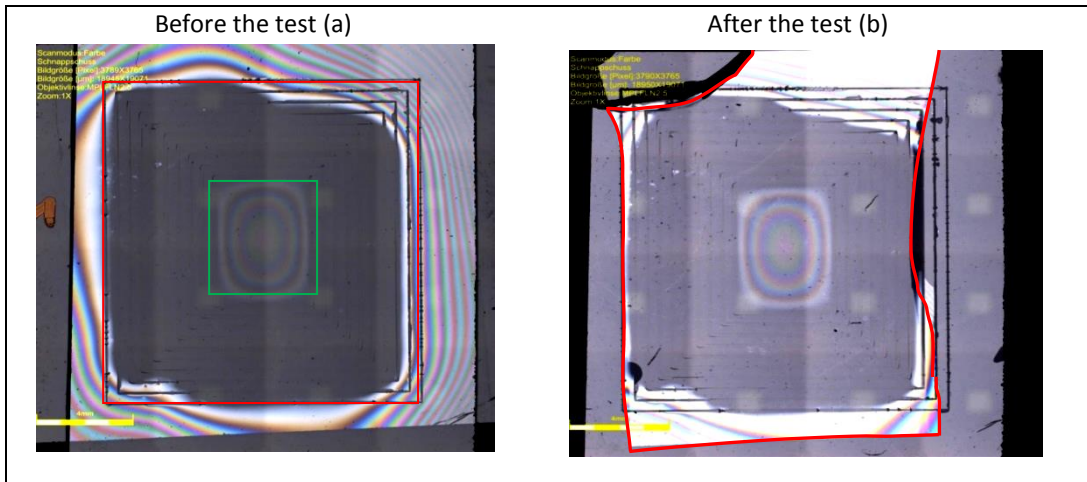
Test of the welded connection. (a) Two sealed glass samples before the strength test, (b) two sealed glass samples after the test
